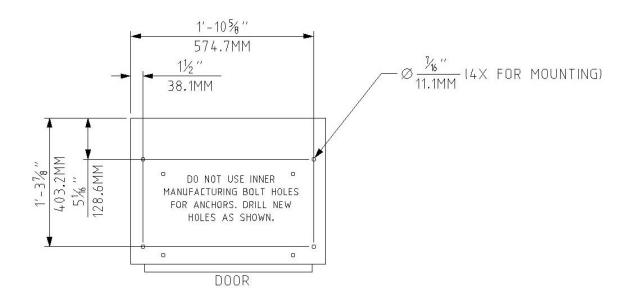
Mounting Hole Locations 2 Cylinder Enclosure or 2 Cylinder Euro (XH) Enclosure
